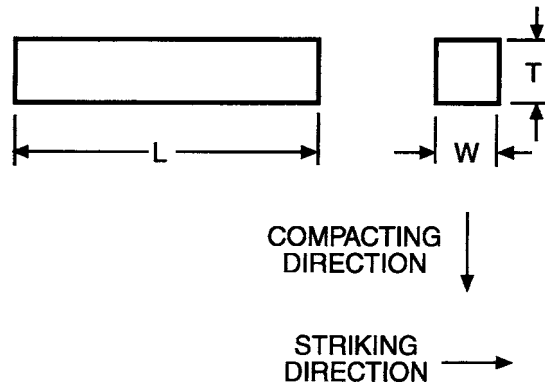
Izod (Cantilever-Beam) Impact Test Specimen, Type D
